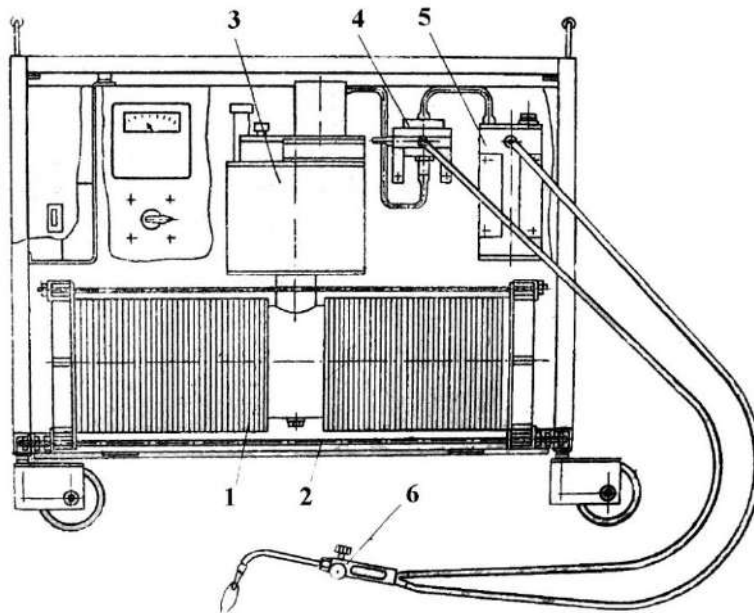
Hydrogen-oxygen welding plant, designed in Kharkiv Petro Vasylenko National Technical University of Agriculture: 1 – power source; 2 – constriction stud bolt; 3 – gas-separator; 4 – gate; 5 – dresser; 6 – burner
